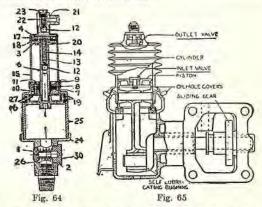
The impulse pump, sometimes termed the spark-plug pump, because it is screwed into the spark-plug hole and operates by means of the compression of the engine cylinder. (1) Inlet valve disk; (2) Inlet valve body; (3) Upper piston; (4) Upper piston nut; (6) Piston rod; (7) Stuffing box; (8) Rod packing; (9) Rod packing nut; (12) Ball check valves; (13) Upper piston pin; (14) Check valve spring; (15) Upper cylinder shell; (16) Lower piston; (18) Piston cup leather; (19) Piston rings; (21) Outlet valve; (22) Outlet valve spring, (23) Outlet valve cap; (24) Cylinder base; (25) Lower cylinder shell; (26) Inlet valve seat.
